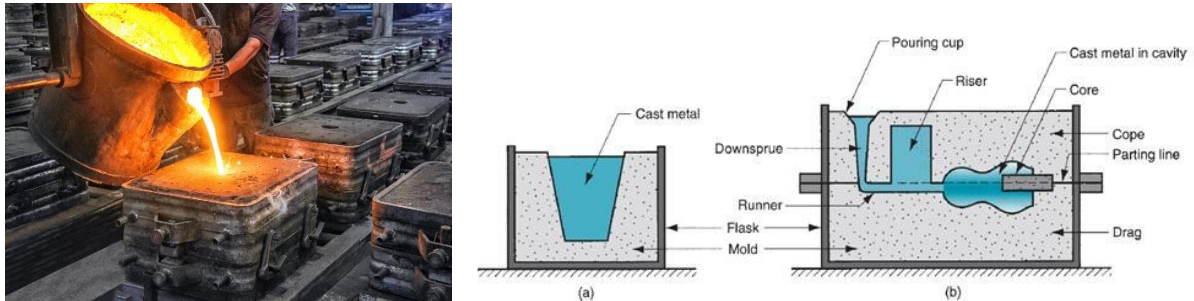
Left – casting molten metal with sand casting (Weld2Cast 2023)
